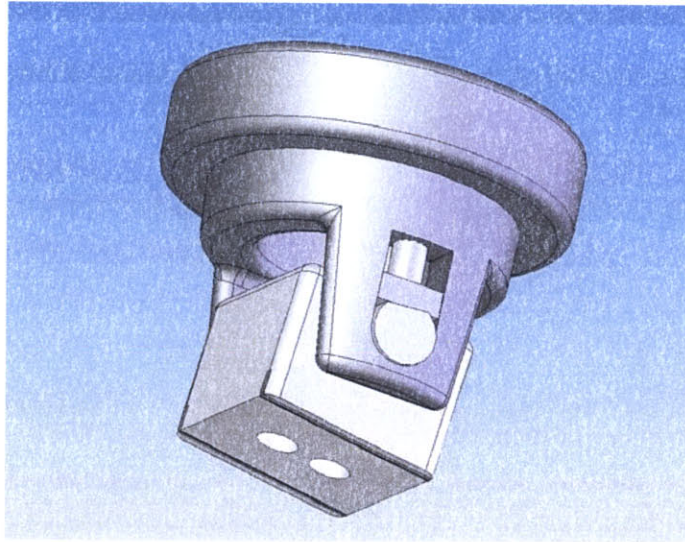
Solid Model Drawing of a Future Prototype CSOS
